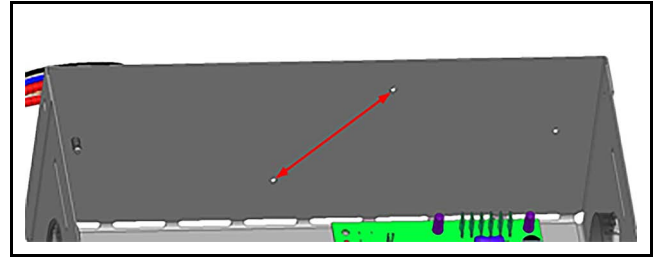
Holes Locations to be Marked ((LM Control Box Bottom View)
